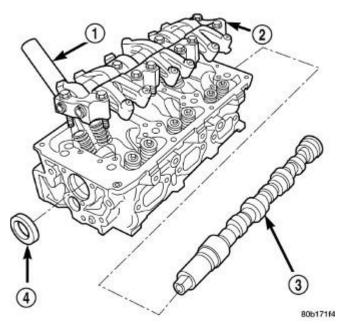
Cylinder Head, Camshaft, and Rocker Arms Courtesy of CHRYSLER LLC
